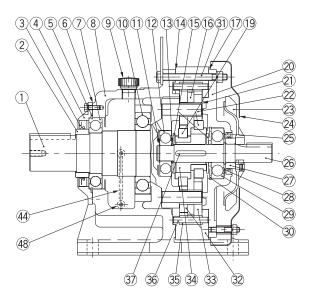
Type CHH (Horizontal, Reducer), Single Reduction (Example: Frame size 6175)
